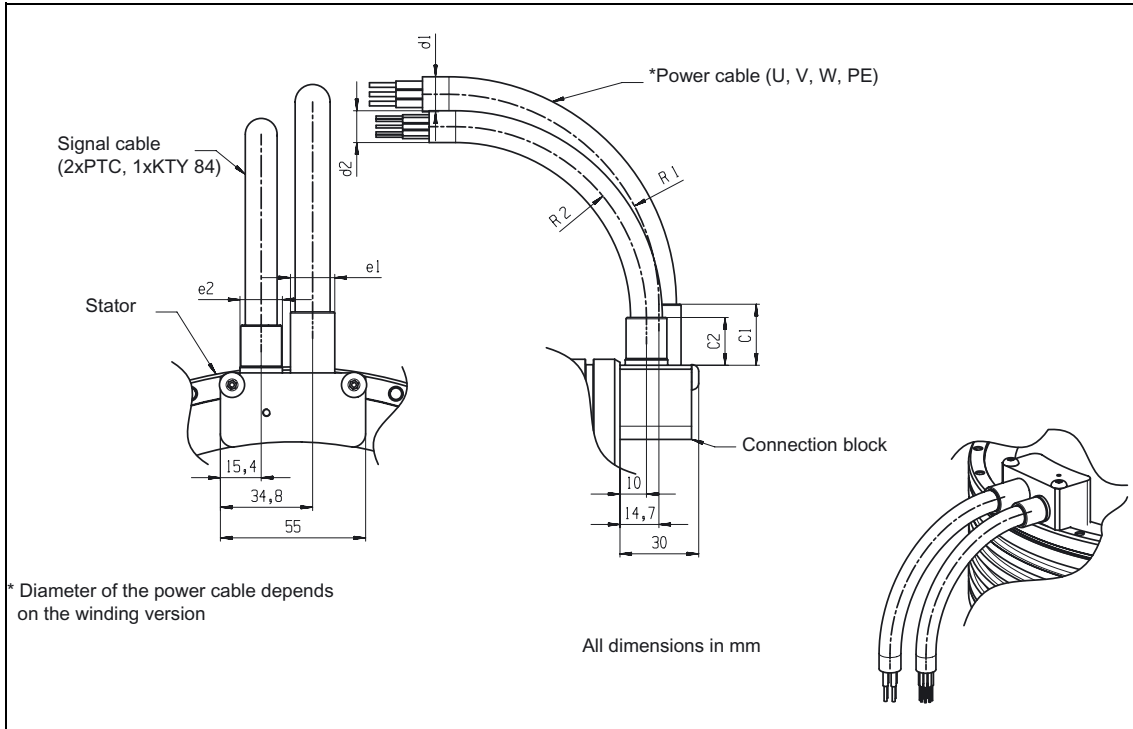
Radial electrical connection with sleeve for 1FW6130 (motor type B)
